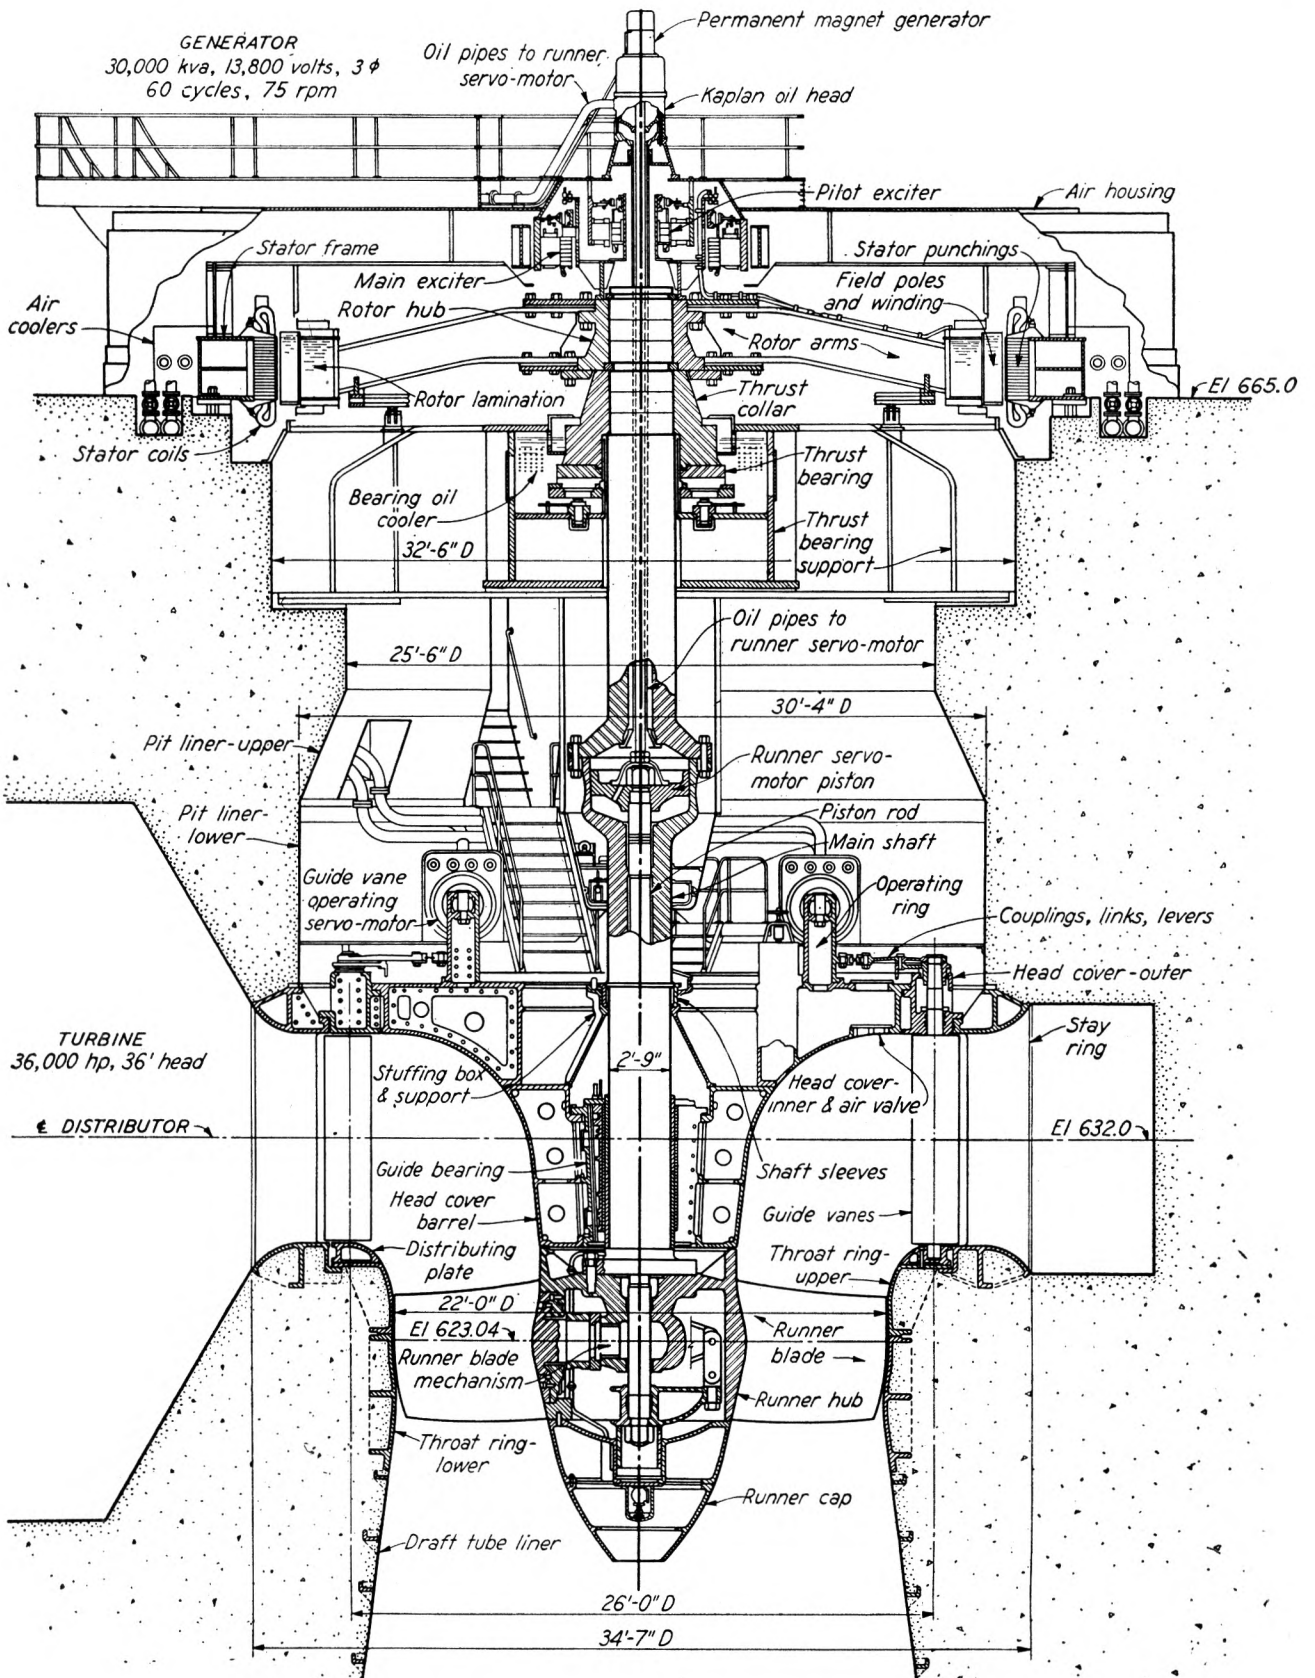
CROSS SECTION OF CHICKAMAUGA TURBINE
